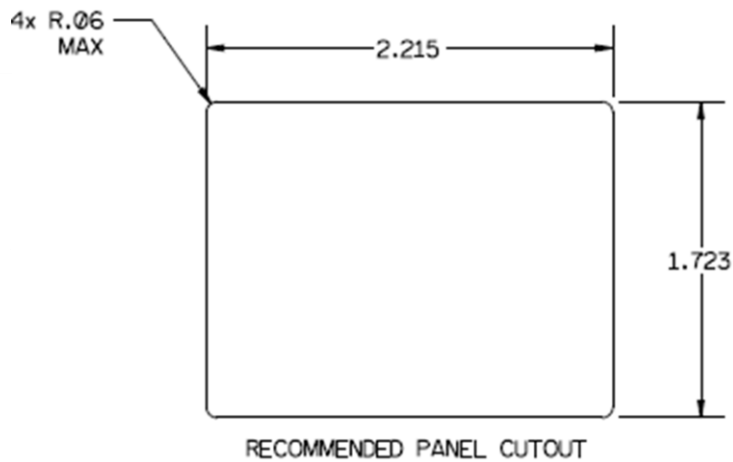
CB-1 or CB-2 Panel Cutout Dimensions
